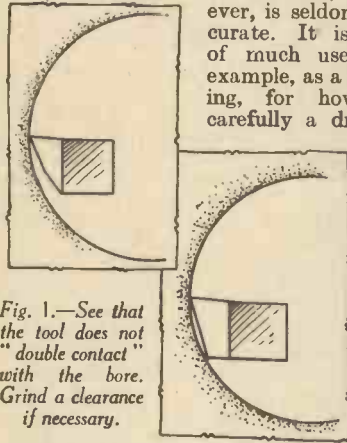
See that the tool does not "double contact" with the bore. Grind a clearance if necessary.
